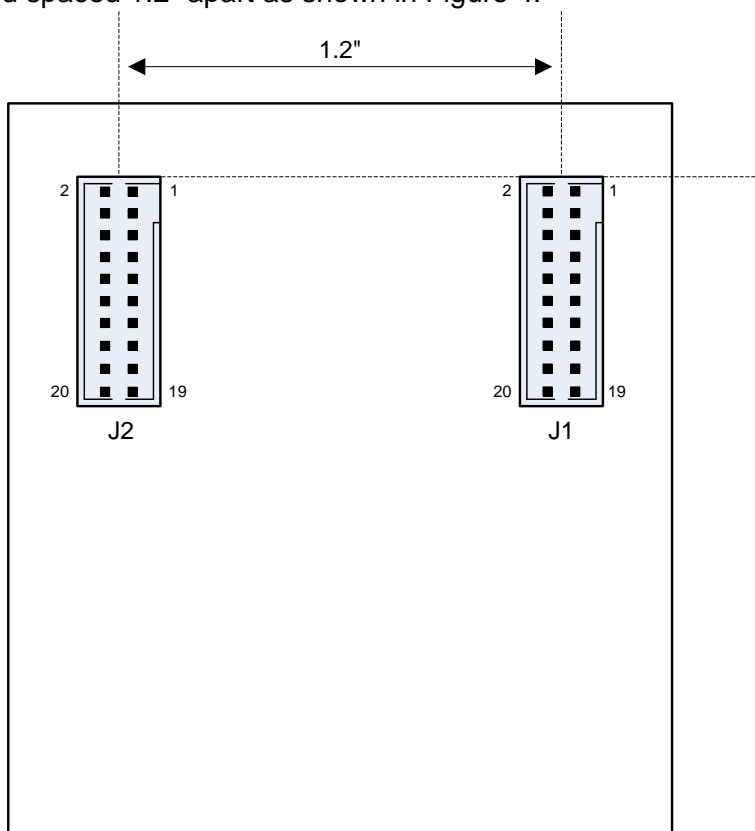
Host PCB EM Mating Connector Arrangement (Bottom View)
